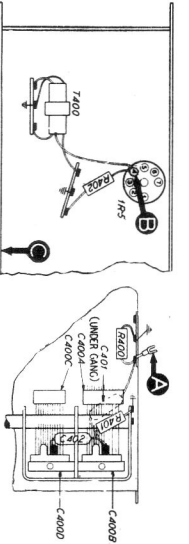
Bottom View, Showing Section 4 Test Points TP-5554D
